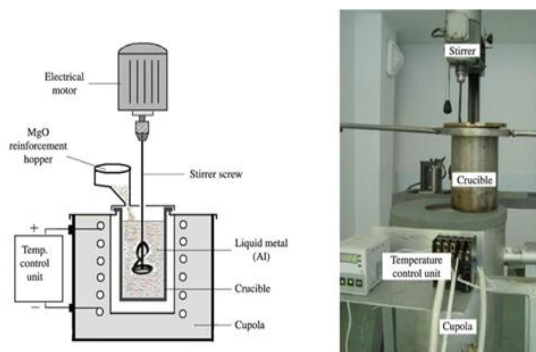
Melt stirring test apparatus (For the production of composite specimens).
